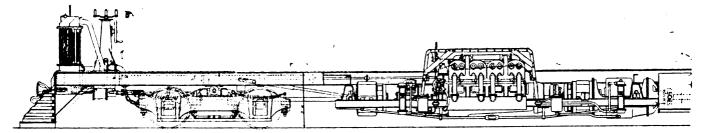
PART SIDE ELEVATION OF LOCOMOTIVE, WITH FRONT SOLE-BAB PARTLY REMOVED.
